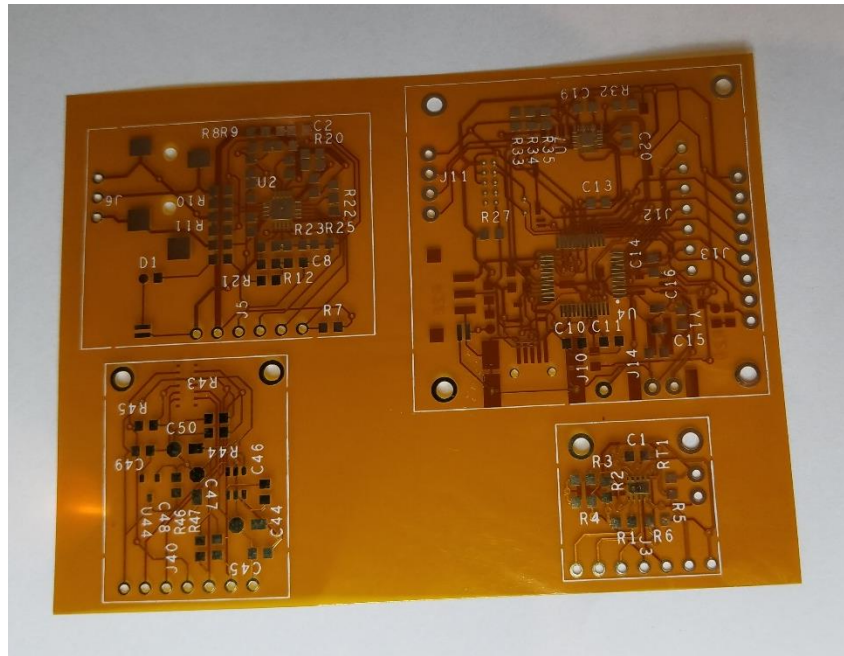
The Flexible PCB Board with All Four Sensor On One Board Layout
